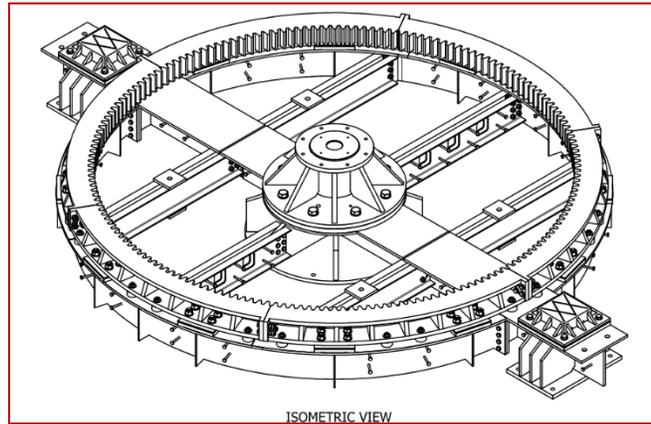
Structural steel grillage shop drawing rendering (Steward Machine)
